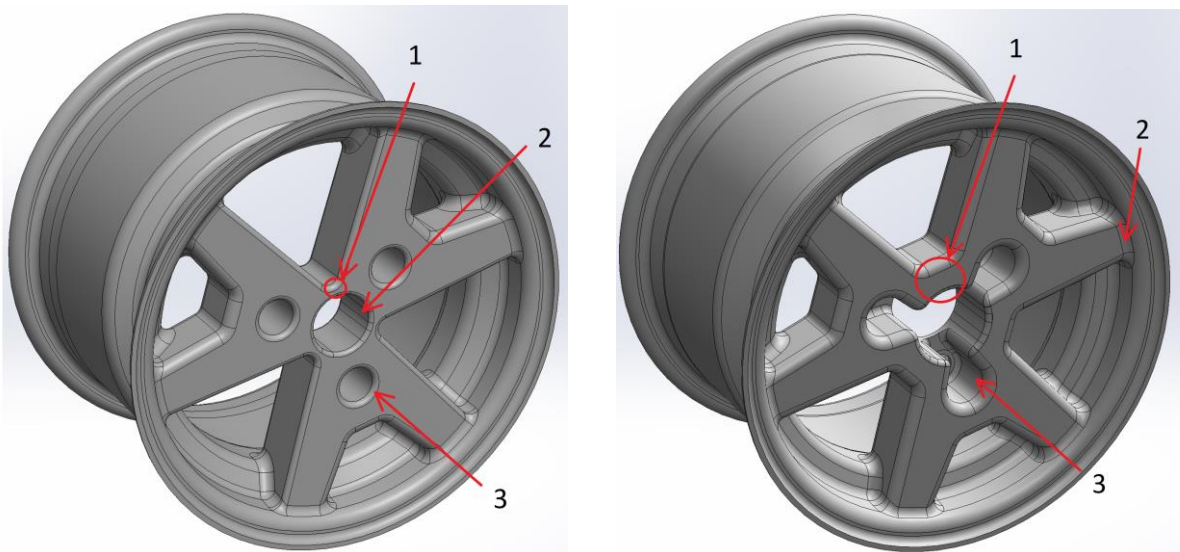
Wheel geometry before (Left) and after (Right) manufacturing tests
